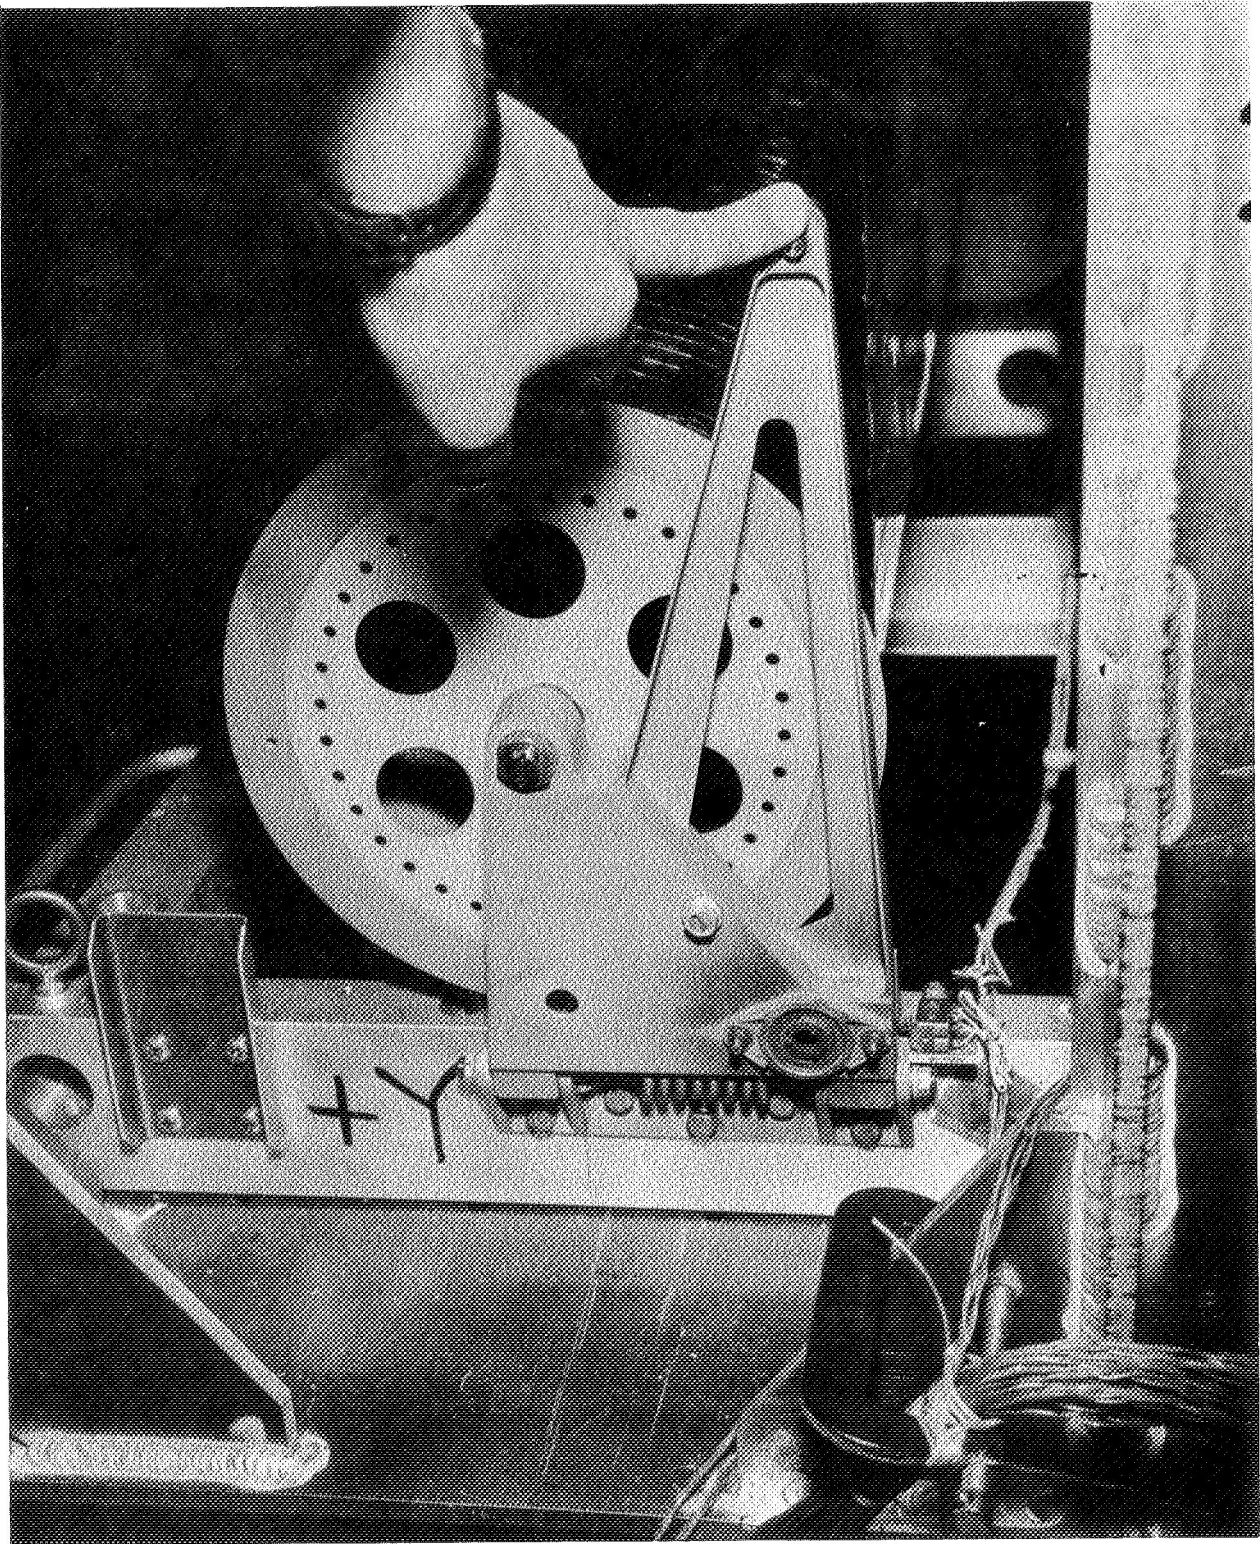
Outboard End Support Showing Fractured Separation Nut Mounting Base (VF 70224B)
